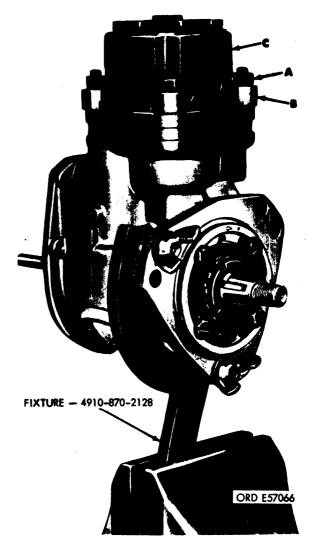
Removing hydraulic head assembly using pump holding fixture-4910-870-2128.
